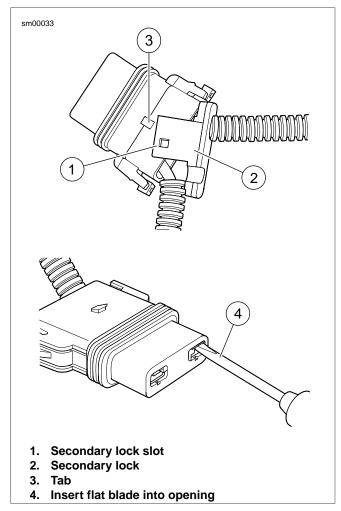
Delphi 800 Metri-Pack Sealed Main Fuse Housing: Remove Socket Terminals
